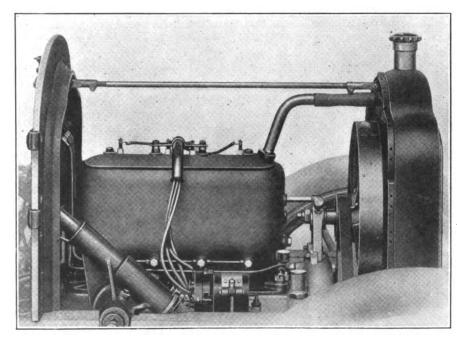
RIGHT SIDE OF THE WHITE GASOLINE MOTOR
